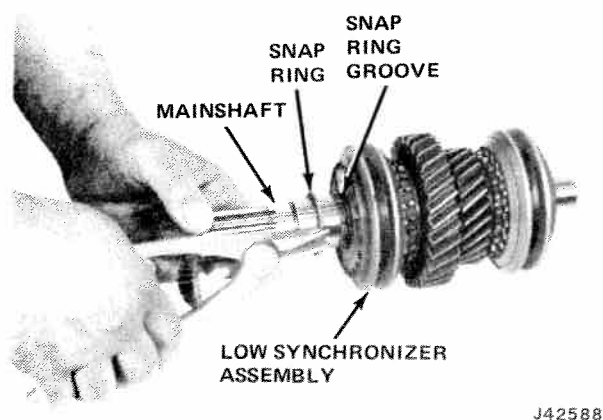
Low Clutch Hub Snap Ring Removal and Installation
